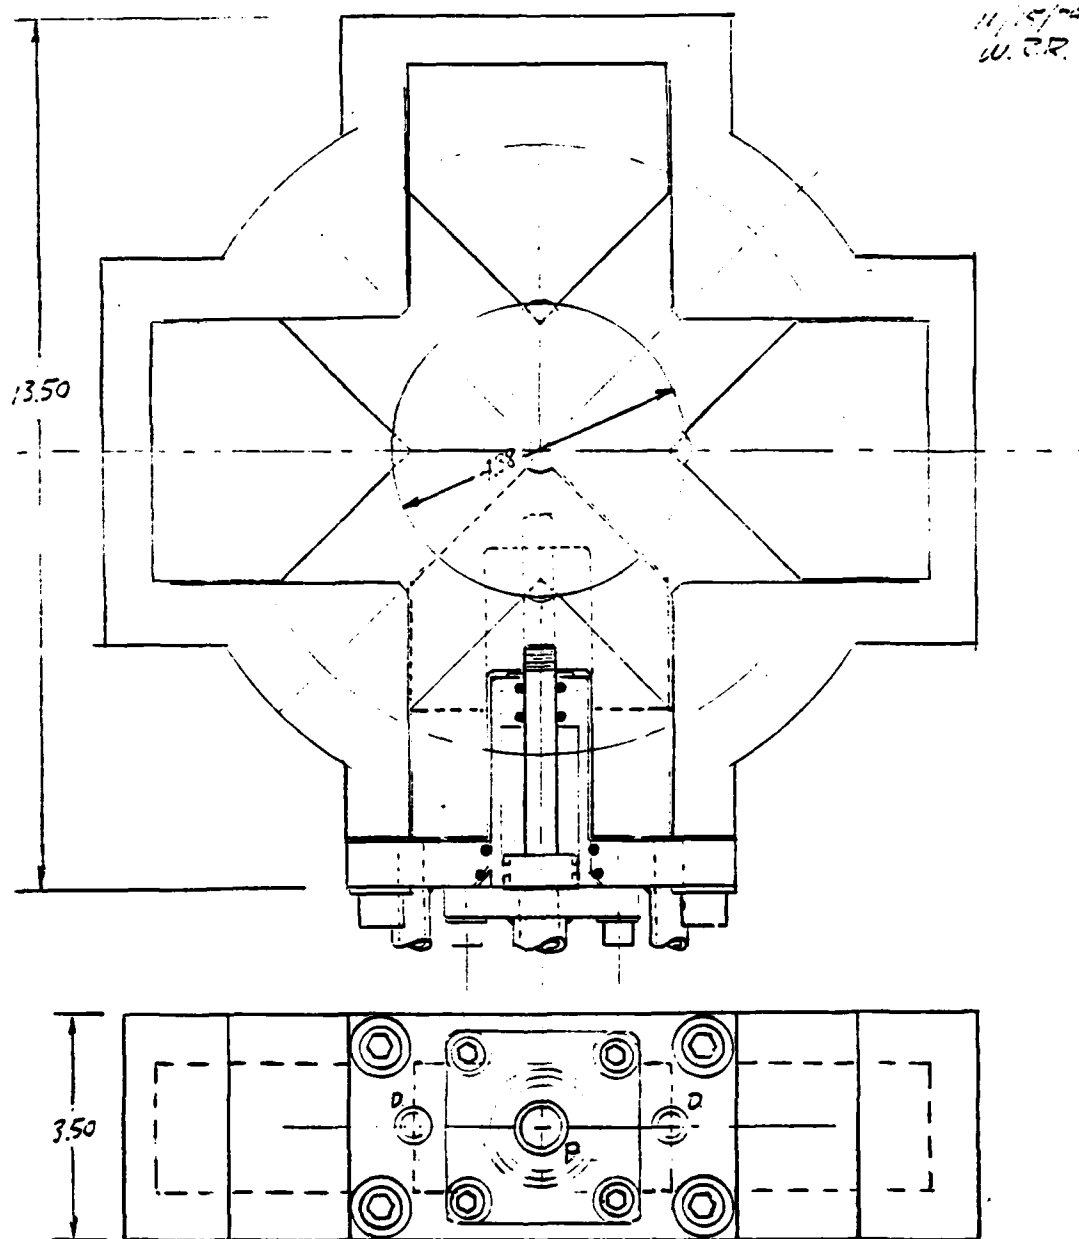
(d). Shear-Seal Rotary Valve Concept (Sheet 2)
